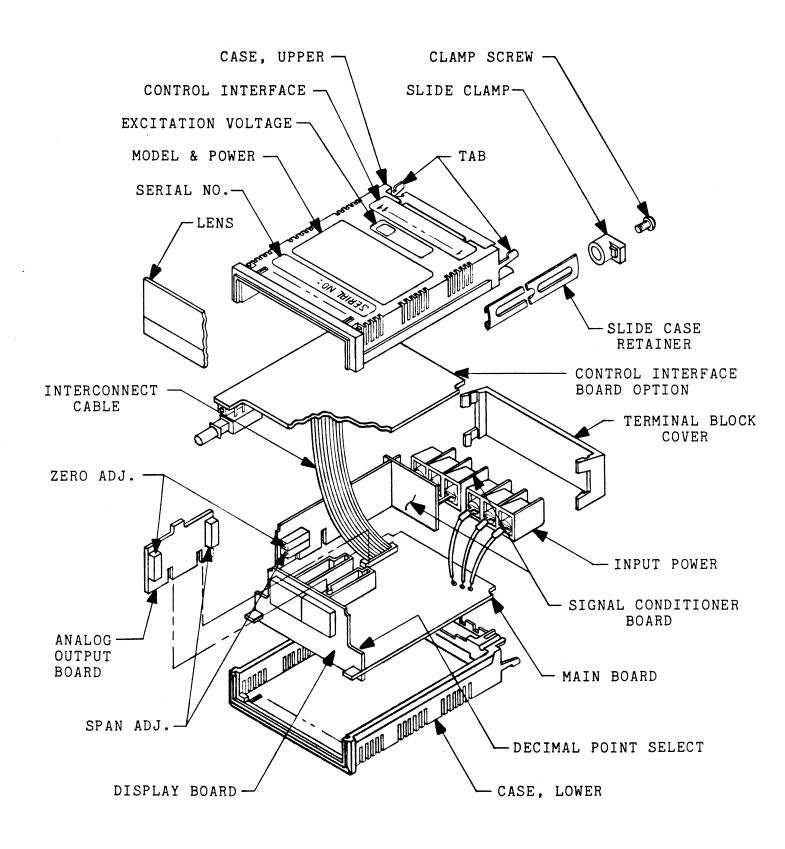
OMEGAROMETER EXPLODED VIEW
